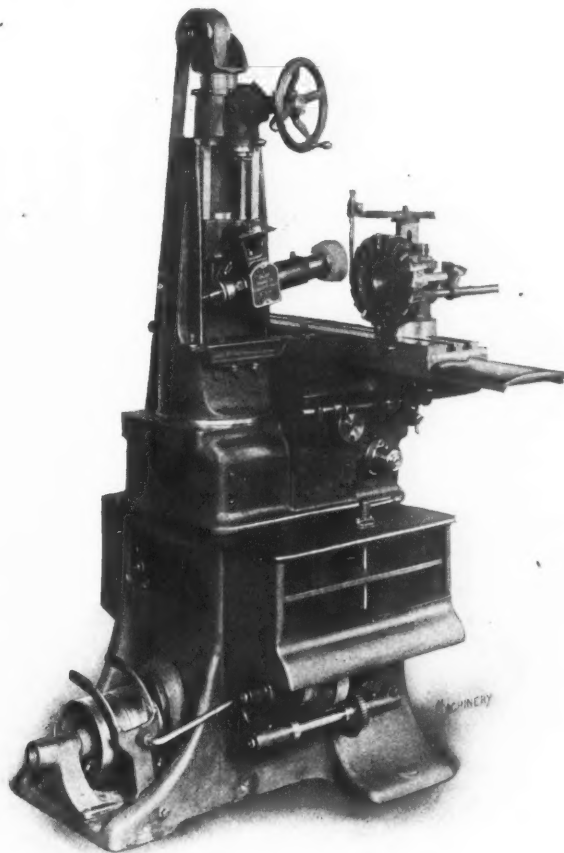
Grinding an Inserted-tooth Cutter on Walker Grinder
